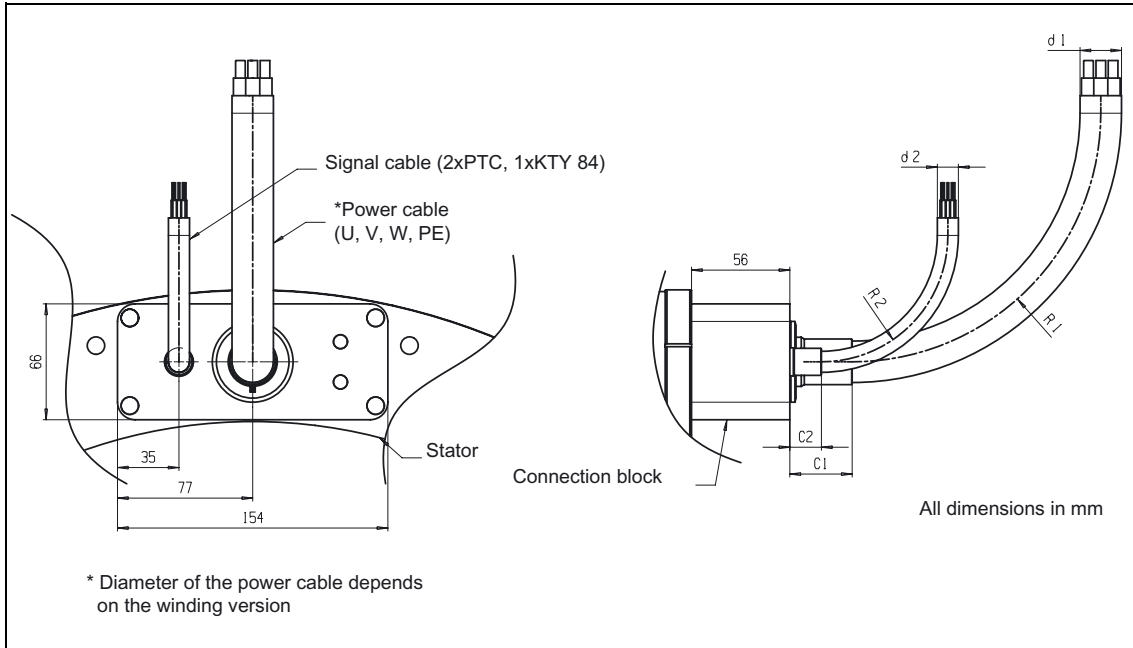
Axial electrical connection with sleeve for 1FW6290 (motor type B)
